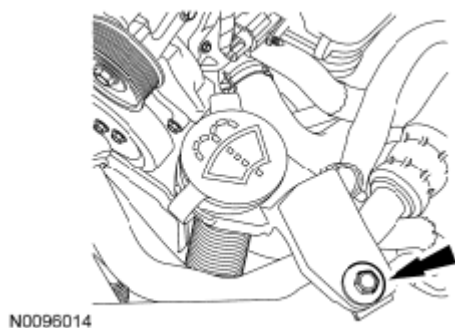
Locating A/C Tube/Windshield Washer Reservoir Bracket Bolt
